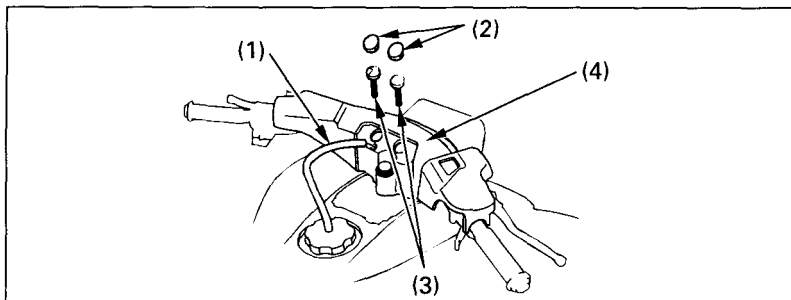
(1) Fuel tank cap brether tube (3) Screws
